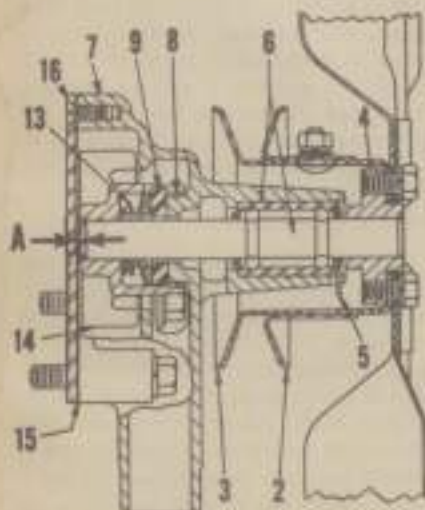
Cut-away drawing of water pump showing 1/32-inch clearance (A) between impeller and pump body. See Fig. 86 for legend.
